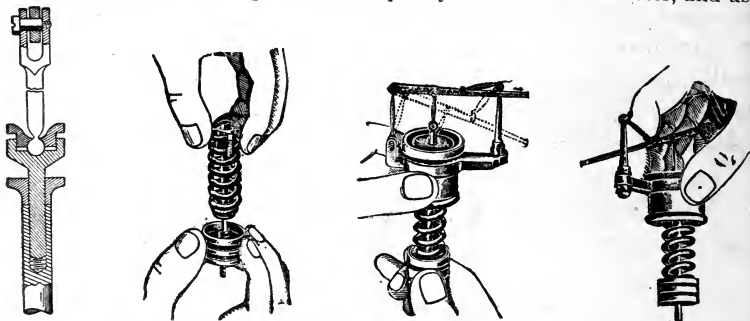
,521.—Head of Thompson indicator showing method of changing a spring. Unscrew the head of the indicator, hold the carrying ring as shown, and the piston and spring may be easily disconnected from the moving parts and head.
